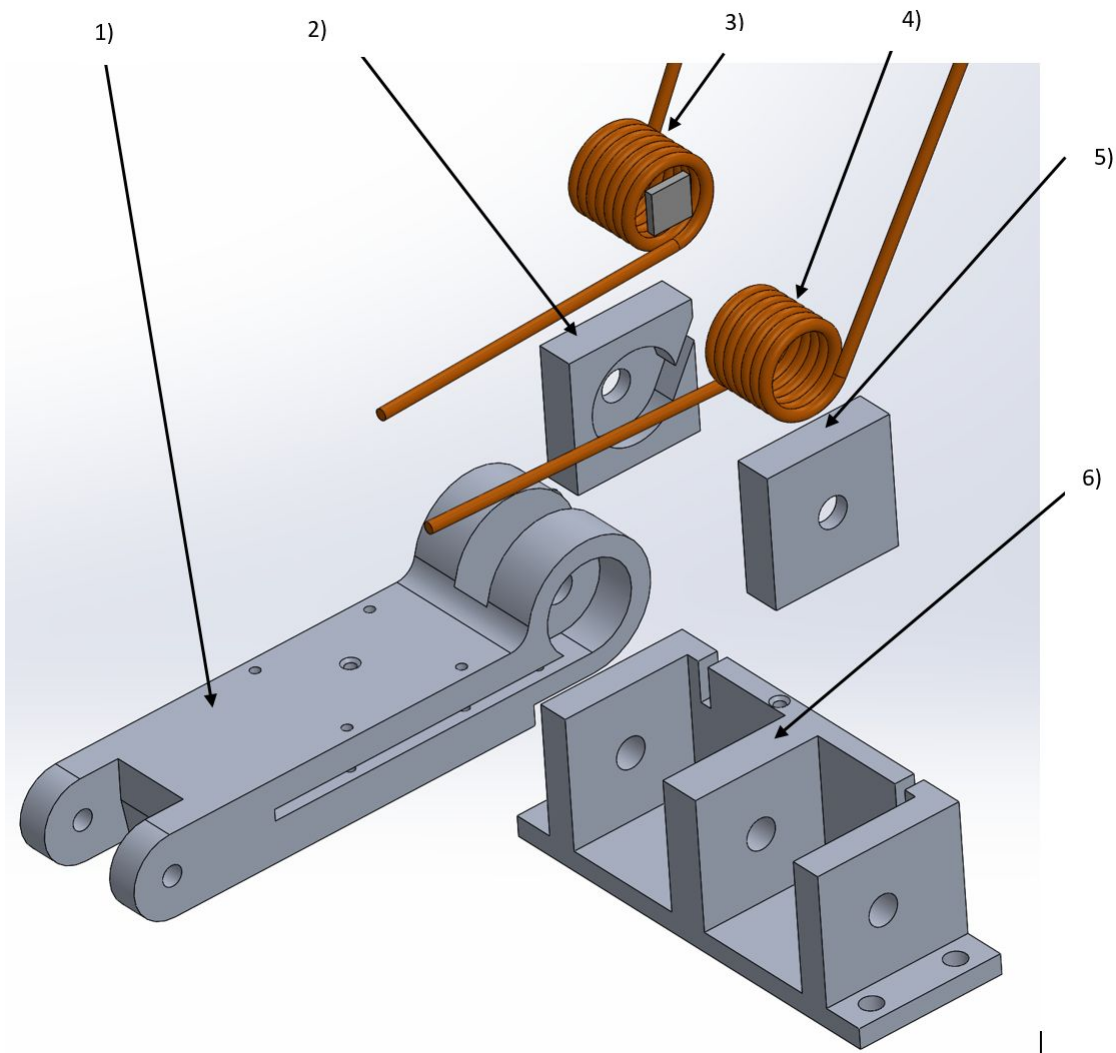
Torsion spring housing in pick up mechanism. [1] connection housing, [2] left housing spring, [3] left torsion spring, [4] right torsion spring, [5] right housing spring, [6] spring housing
